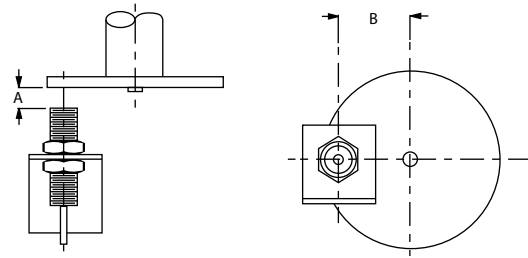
Standard 906 Sensor with 255 Pulser Disc
